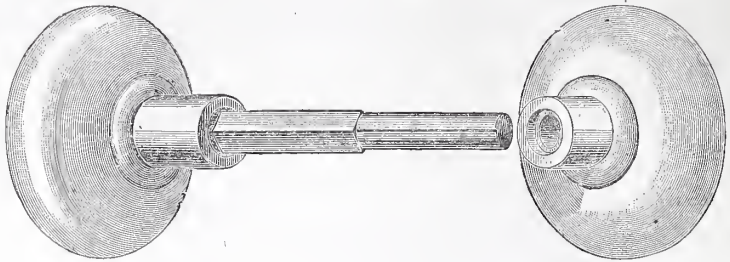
General View of the Peacock Screwless Knob and Spindle, Half Full Size.
